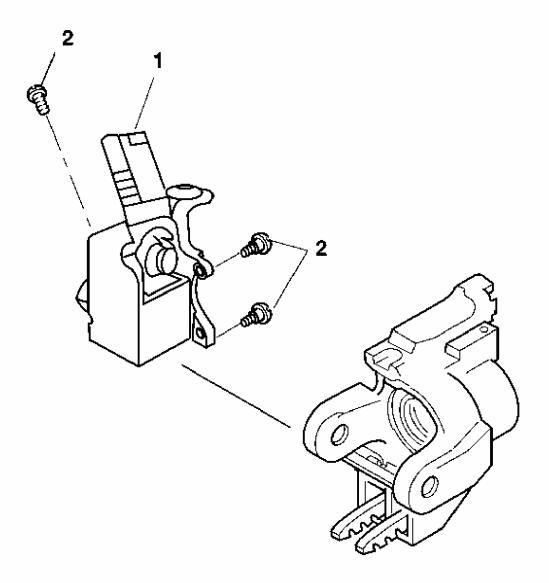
View Of Ignition Lock Cylinder Case Assembly & Screws Courtesy of GENERAL MOTORS CORP.
